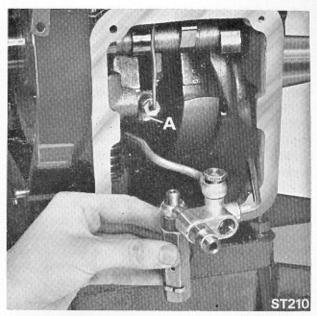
ST1—Oil Pipes (Old type oil pump)
